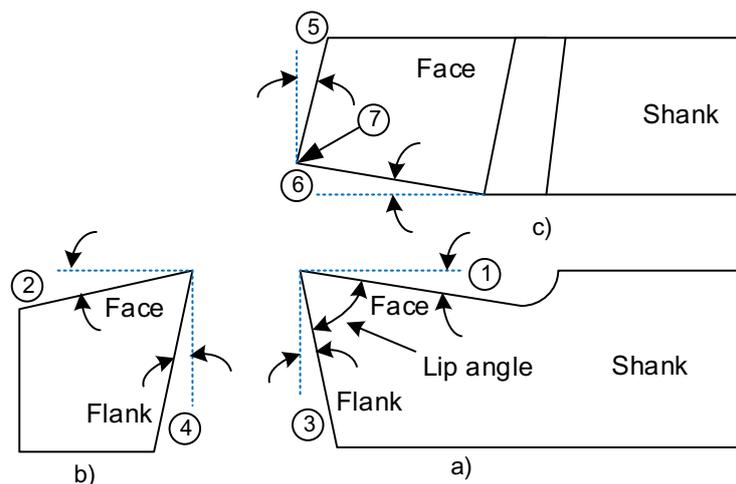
Schematic diagram showing a pictorial view of a single point cutting tool with different parts and angles
